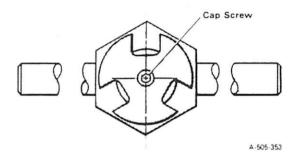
Seat Ring Removal Tool, Part No. 153S22
